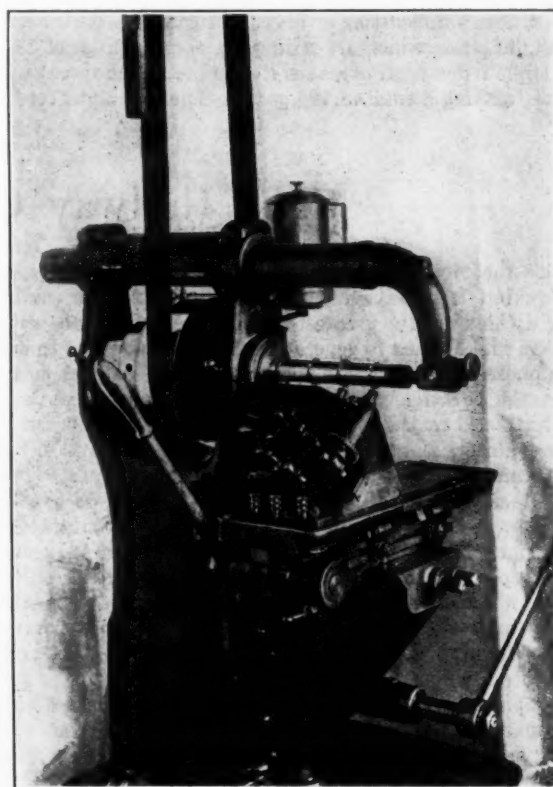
CUTTING THREE BEVEL GEARS AT A SETTING ON A NO. 00 HAND MILLING MACHINE IN 22 SEC. EACH
